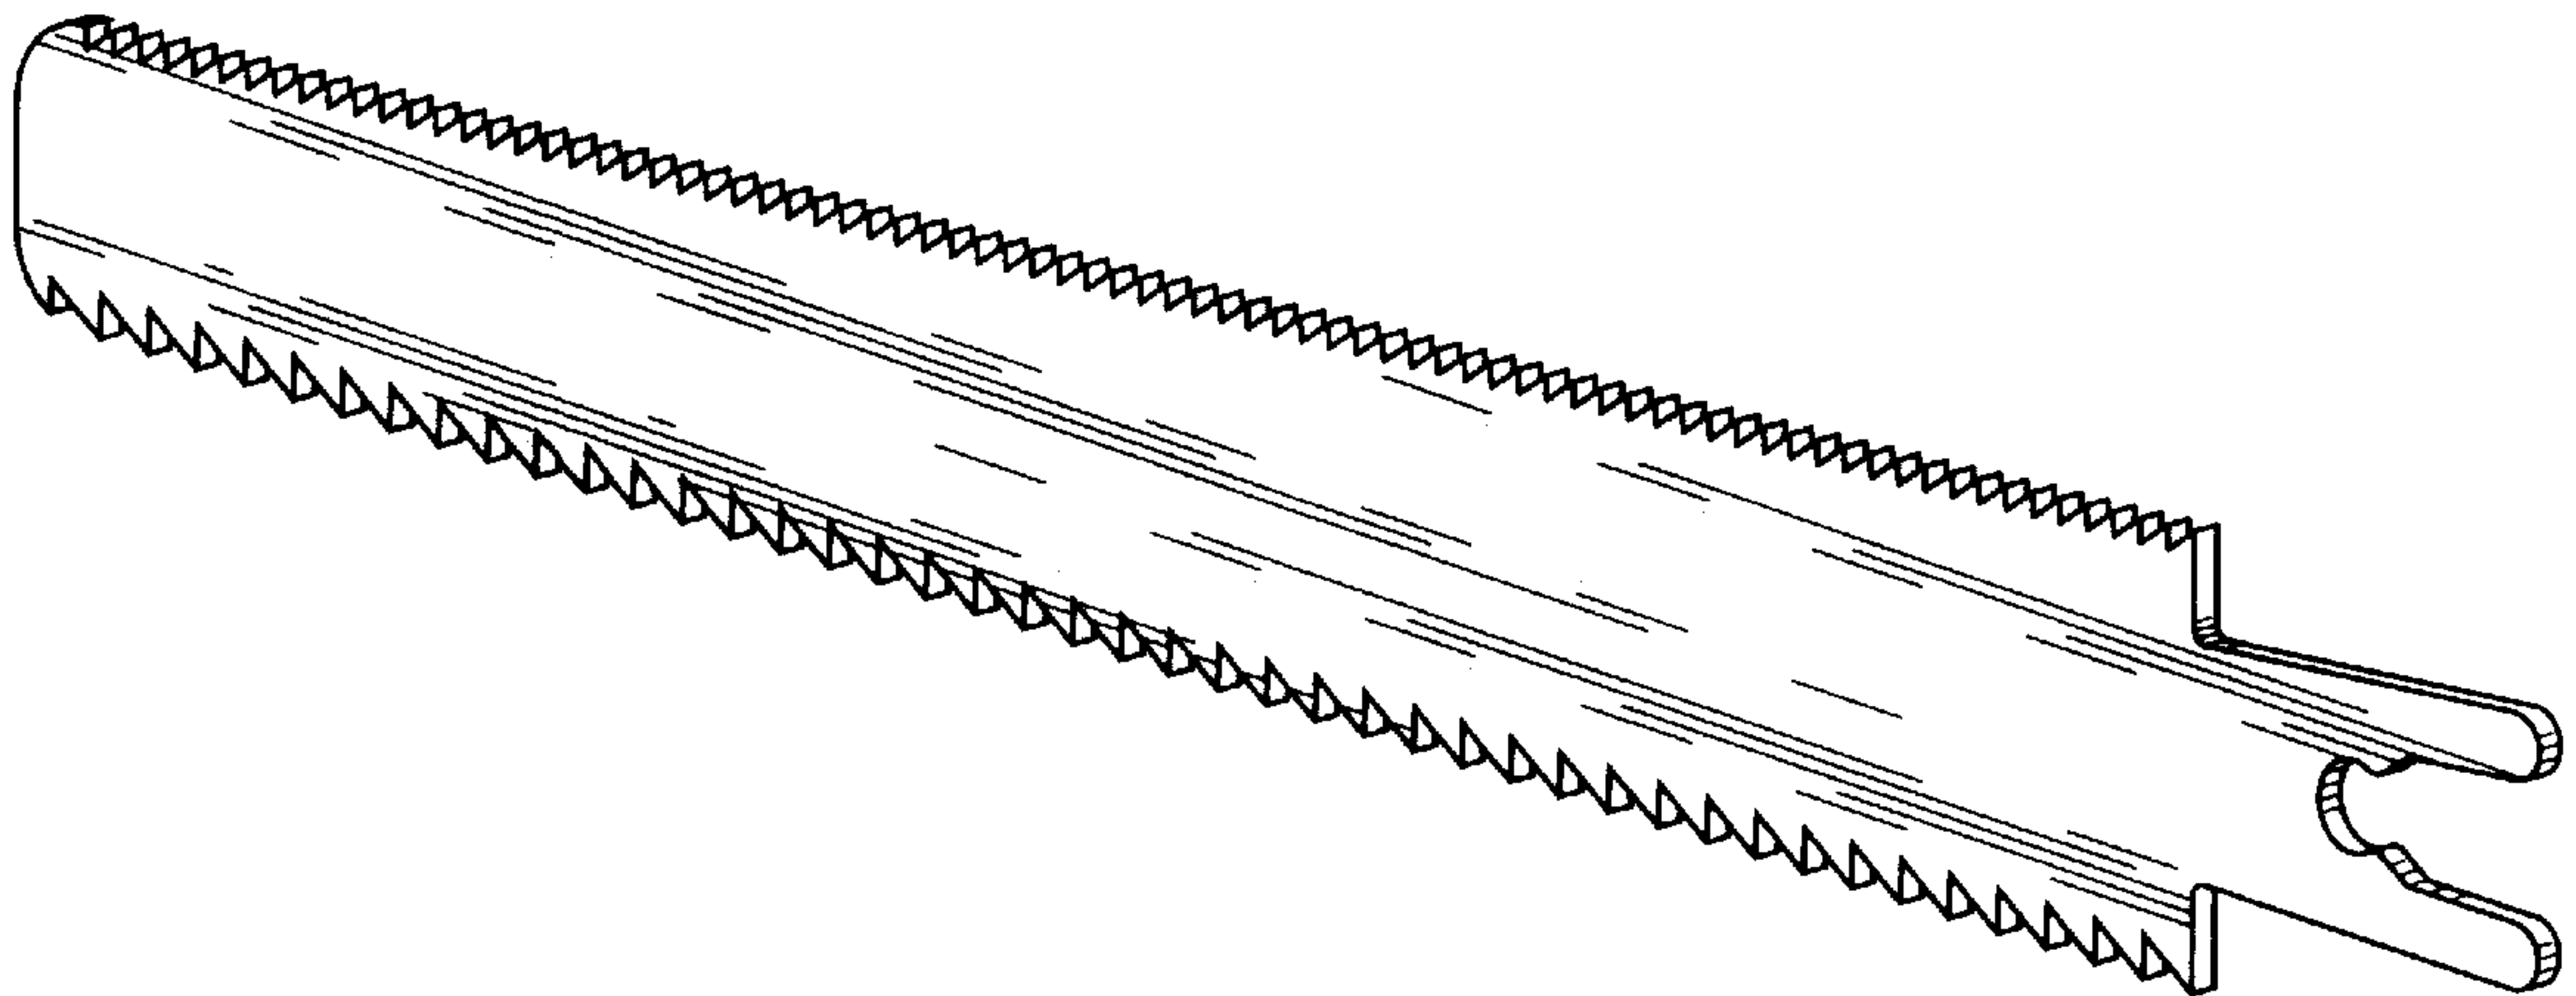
is a rear top, and side perspective view of a double edge saw blade for reciprocating power saws showing my new design;
